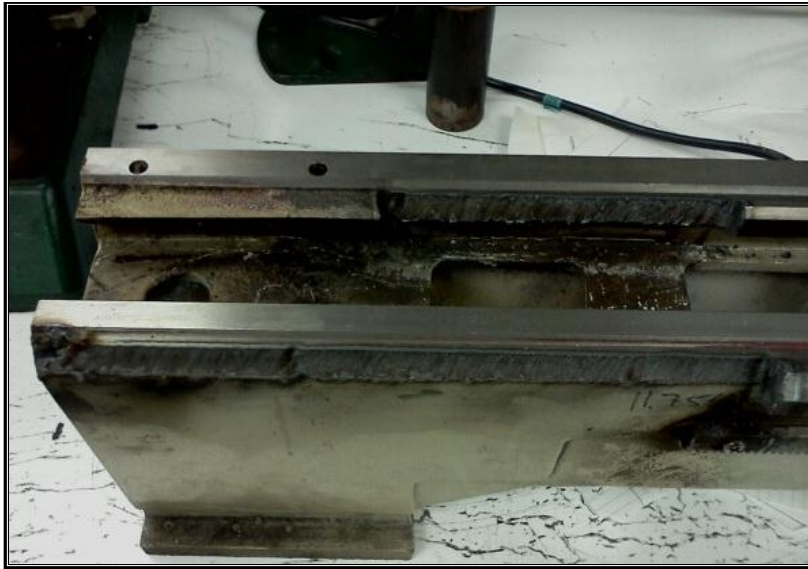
The lathe bed after a section of the rails was removed using a plasma torch.
